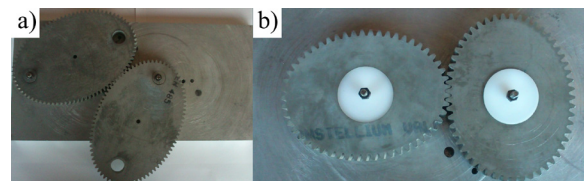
Two manufactured gears; a) elliptical; b) oval
